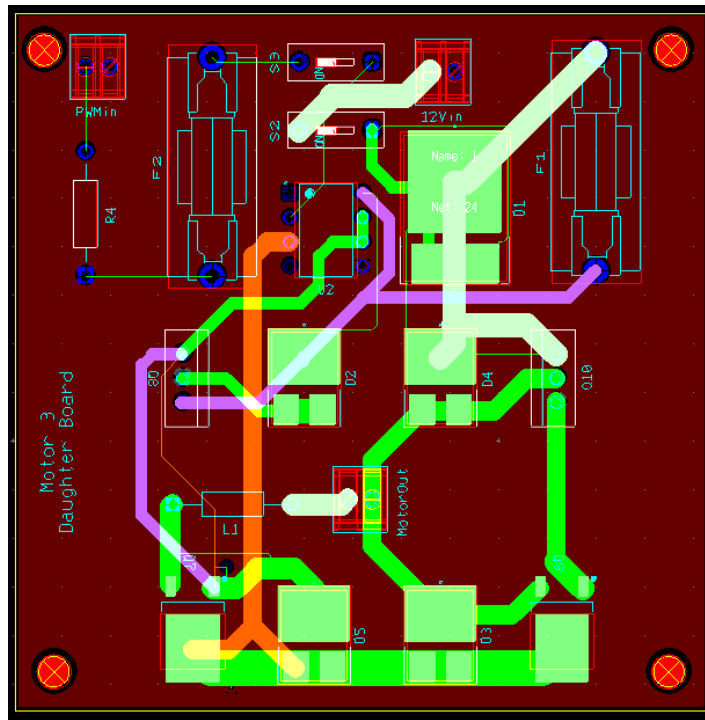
PCB Layout of Motor Driver Board in Ultiboard 14.2
